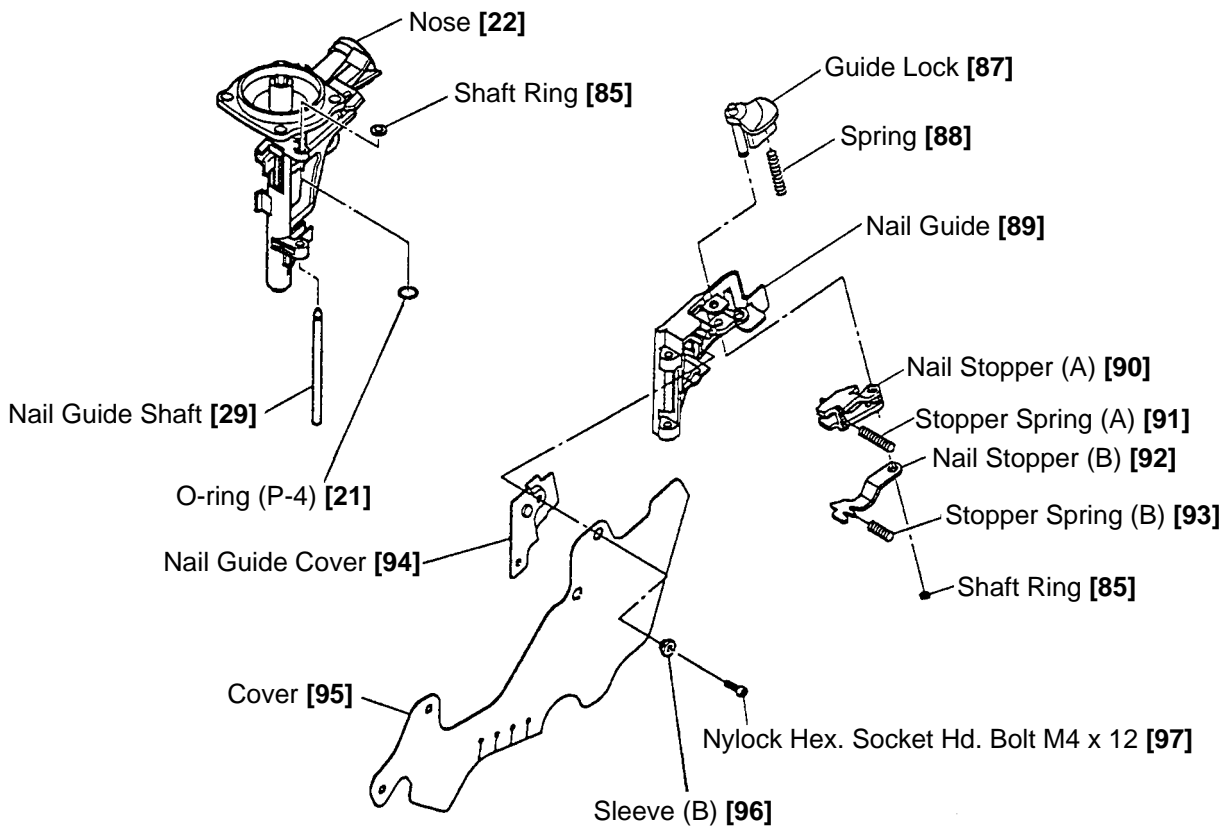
Disassembly and reassembly of nail guide, nail stopper (A), nail stopper (B) and other parts
